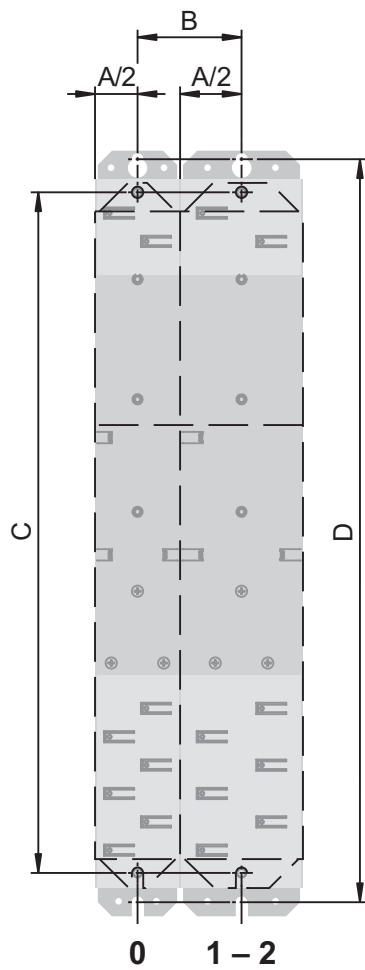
Bore dimensions for DL6B Quick DC-Link [mm]
